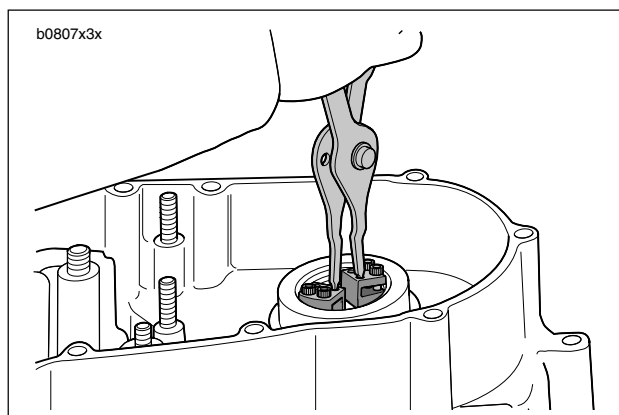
Sprocket Shaft Outer Race Removal
